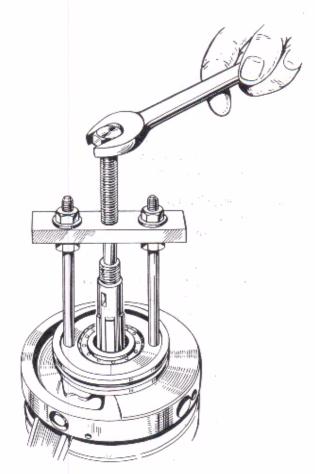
Using tool No. 61-3778 to remove the roller bearing inner race.
